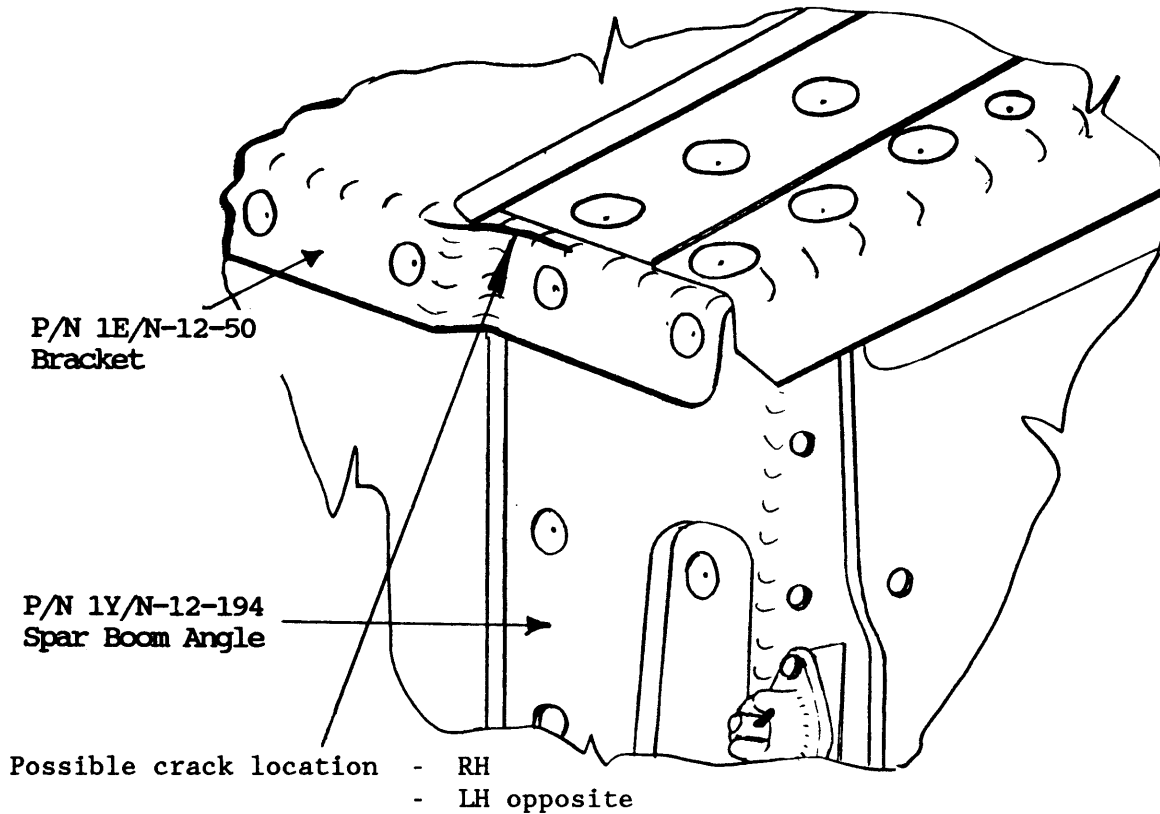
View Inside Stub Fin Looking Through Inspection Panel
